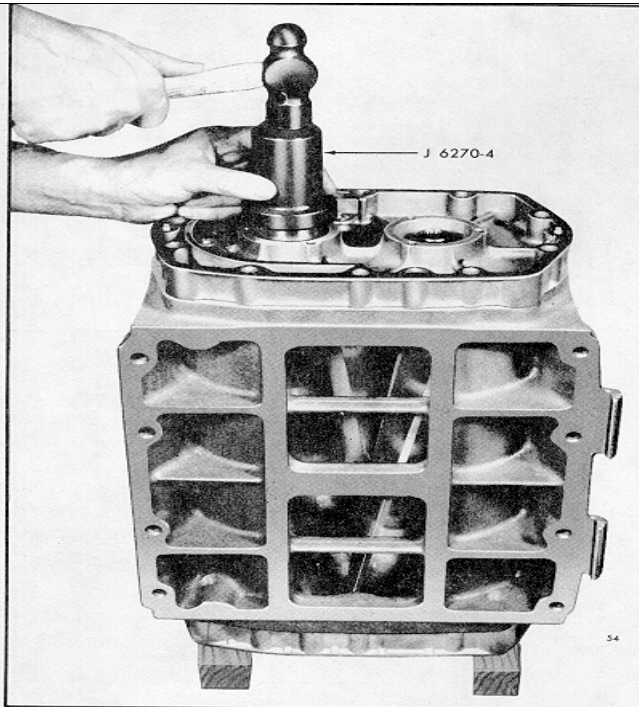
Installing Roller Bearing on Rotor Shaft and in Front End Plate
